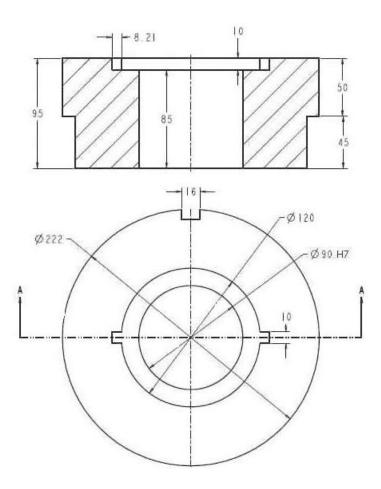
Technical Drawing of the Upper Coining Supporting Die
